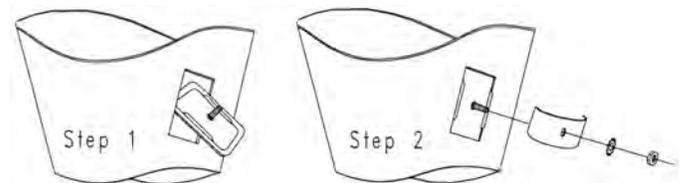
B - Insert subassembly into vessel opening and secure subassembly to vessel with spring bracket. Secure bracket with hardware.
